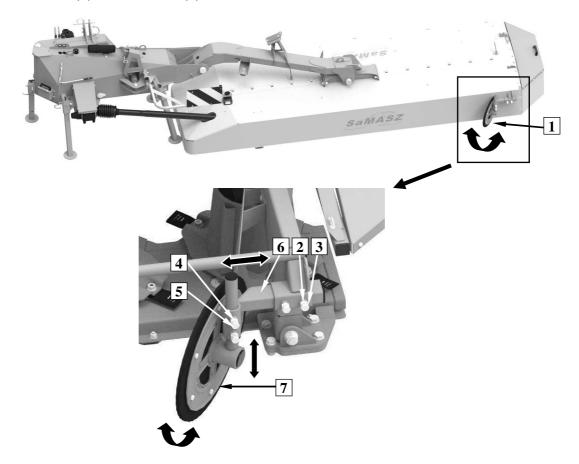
Adjustment of swath guides: 1- swath guide, 2 - locknuts, 3 - arm adjustment screws, 4 - locknuts, 5 - shield adjustment screws, 6 - guide arm, 7 - shield
